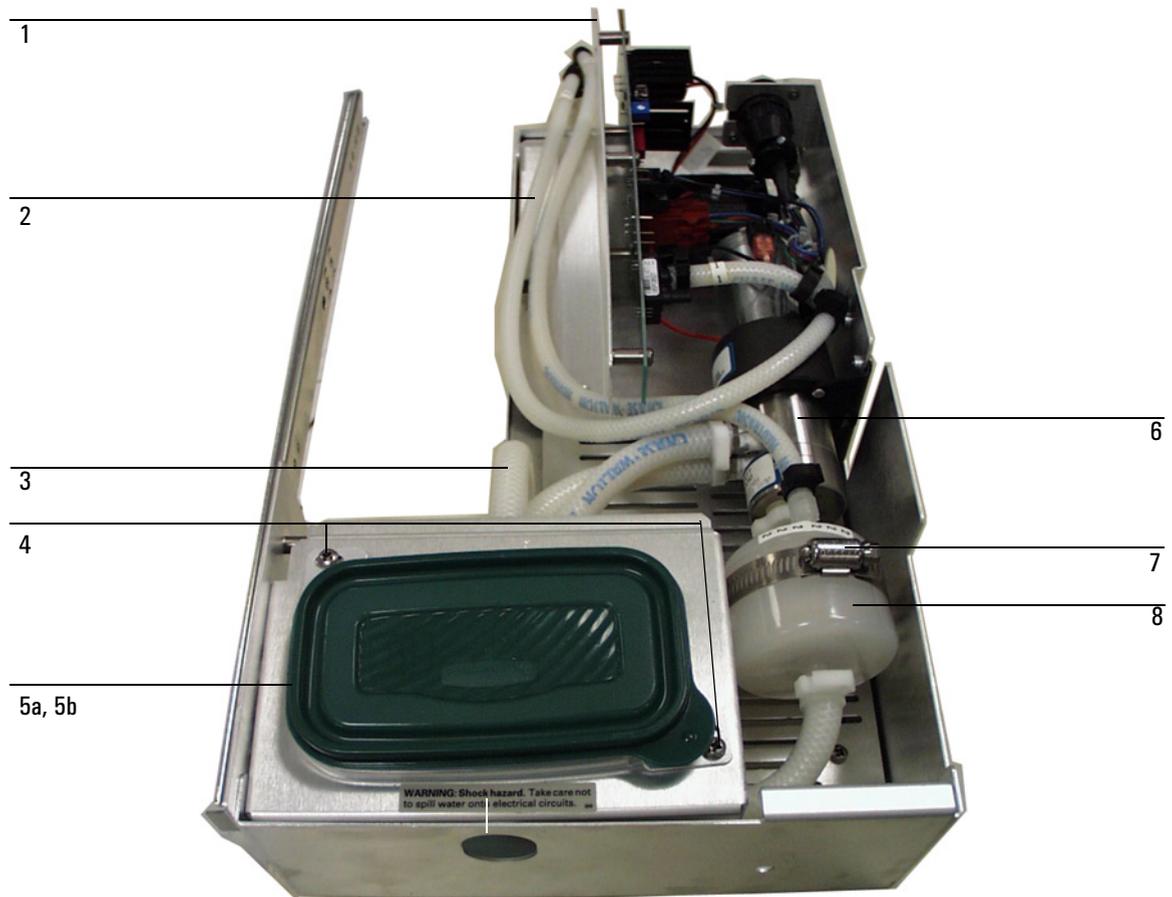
Spectrometer assembly, part no. G2350-61170
